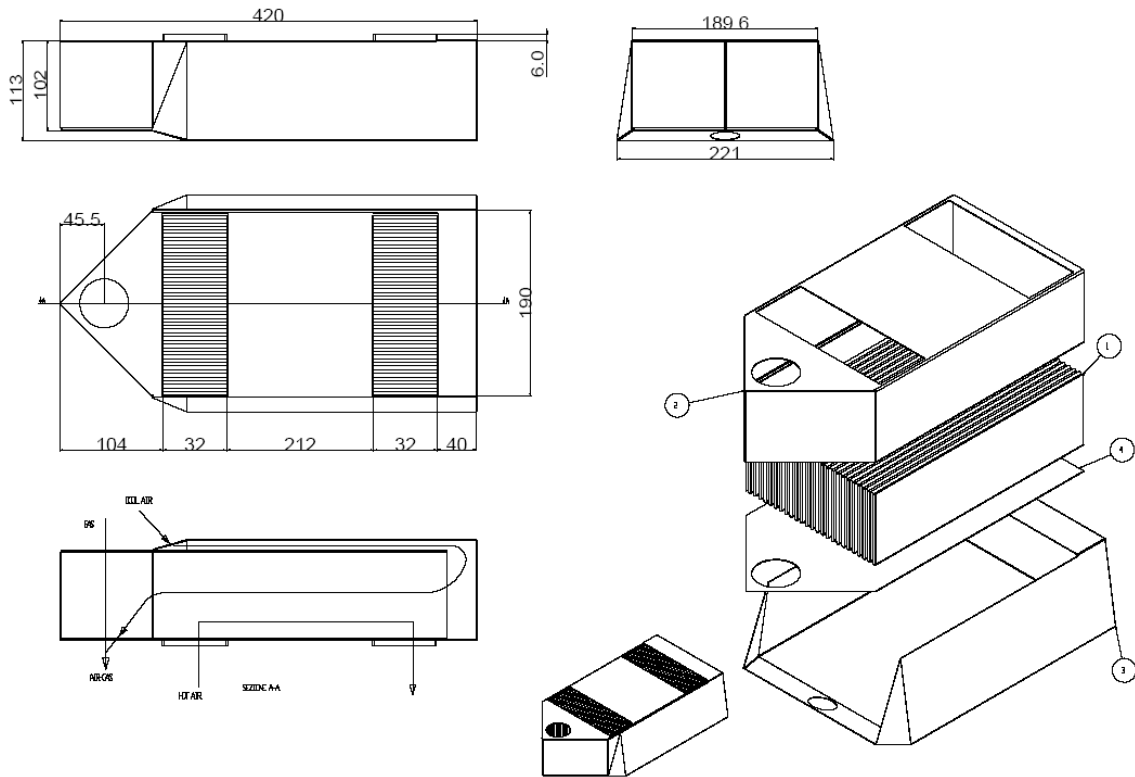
1 kW Folded Sheet Recuperator (dimensions in mm)
